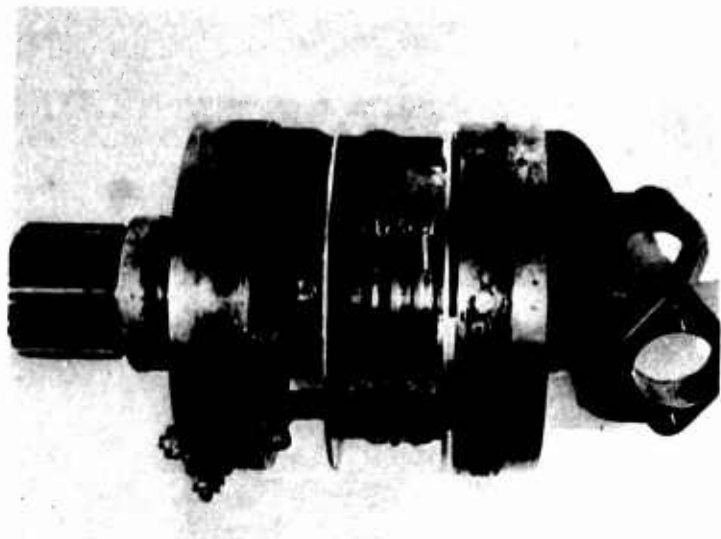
is yet another version used in the limited space available on the LVW where the signal was taken out of the end of the shaft through a miniature slip ring assembly.
